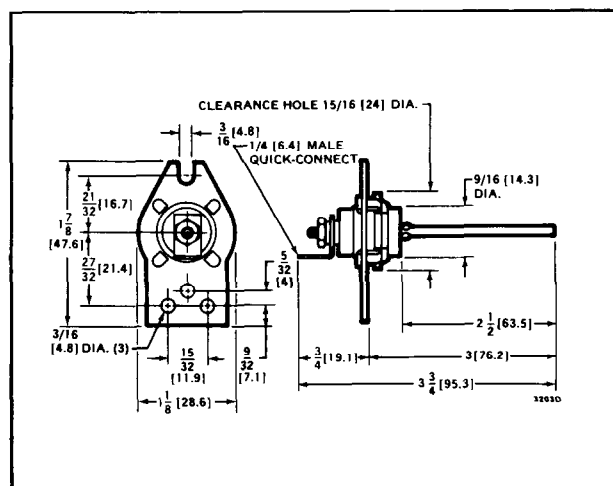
DIMENSIONS IN in. [mm IN BRACKETS] OF Q354A.
